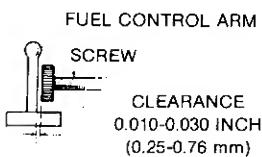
FUEL SOLENOID ADJUSTMENT
